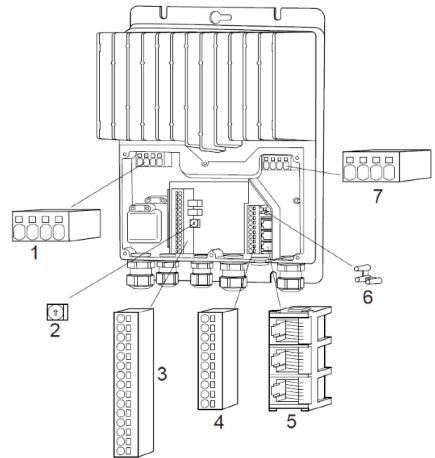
Location of components on the mounting plate OJ-DRHX-1690
